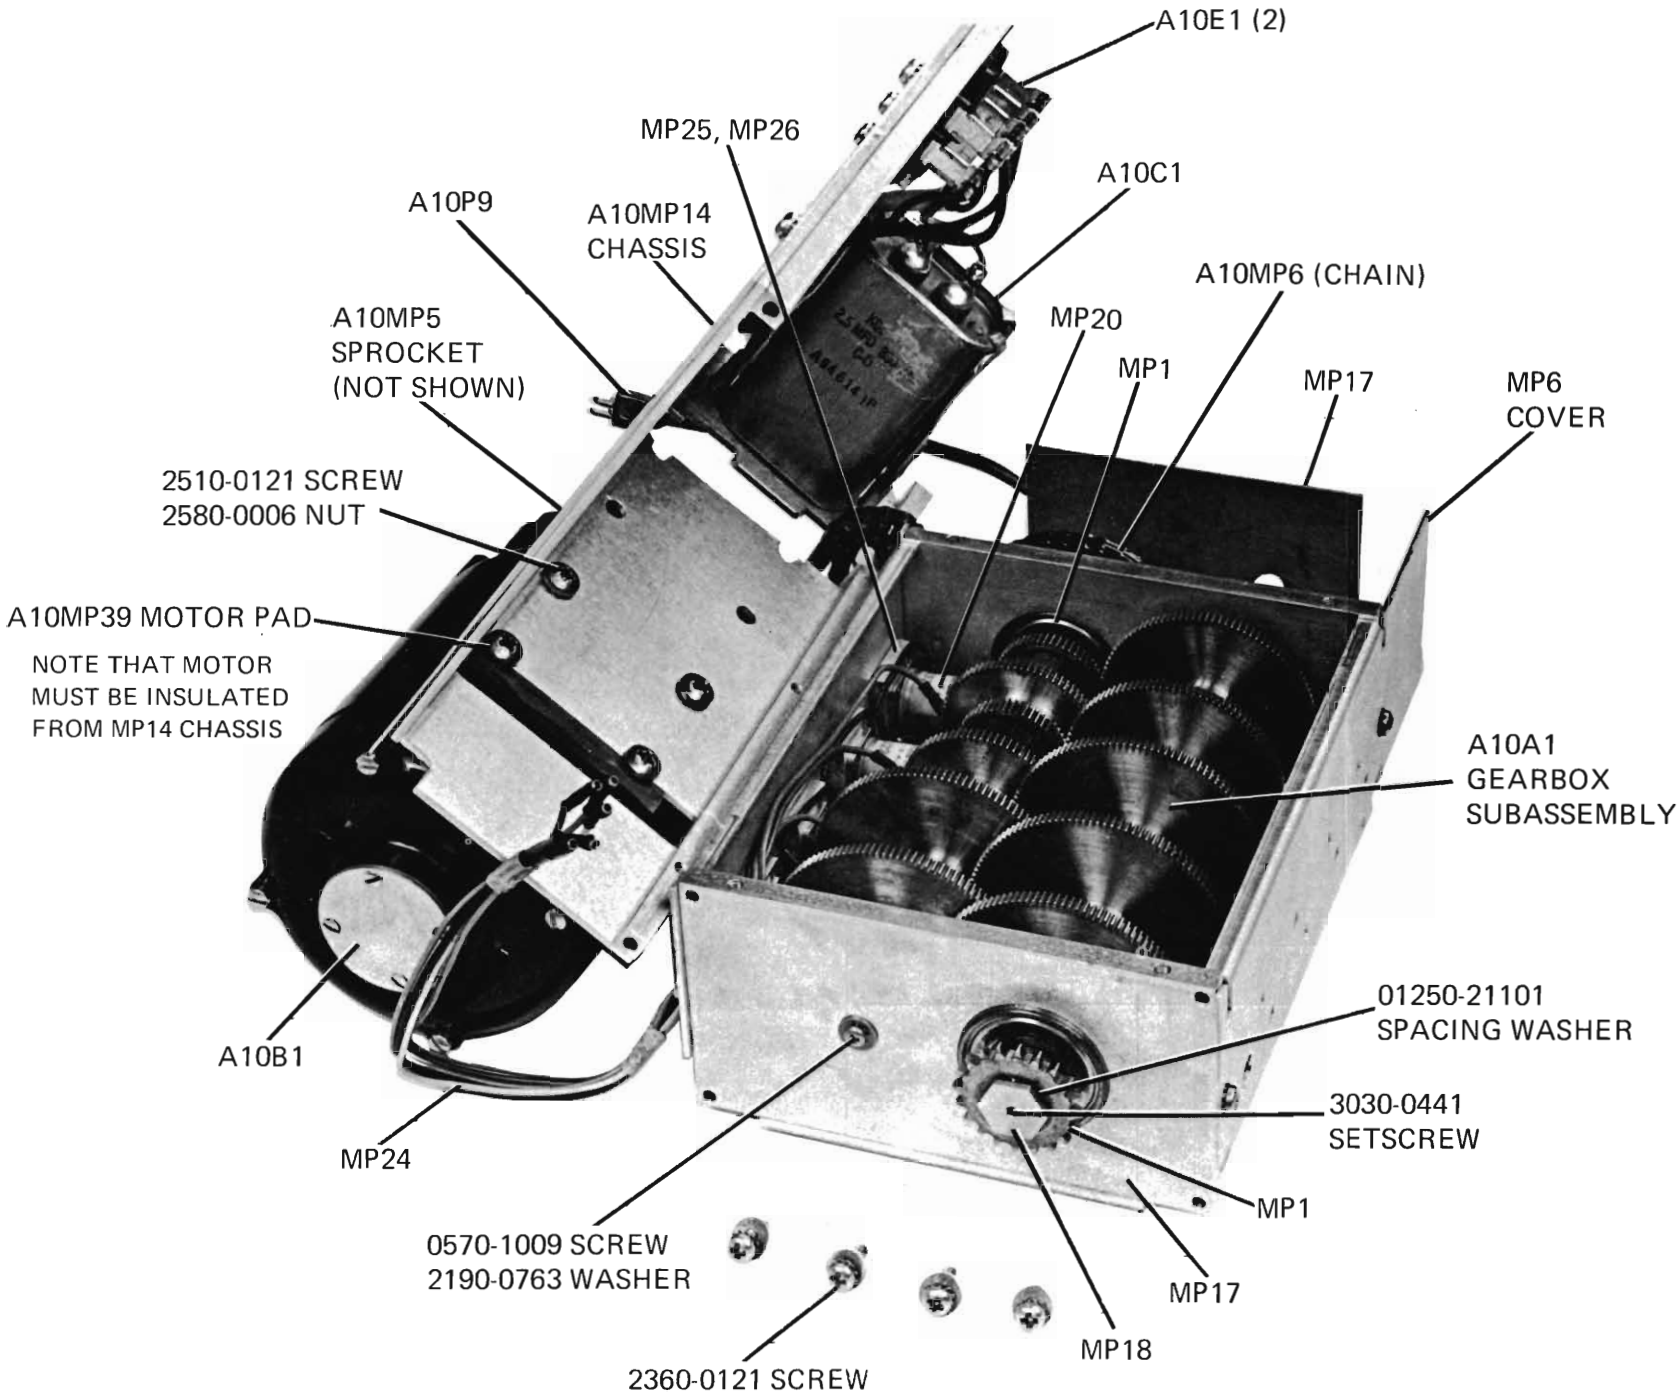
Drive Unit A10 (07754-60250) Subassemblies, Parts Location Diagram
